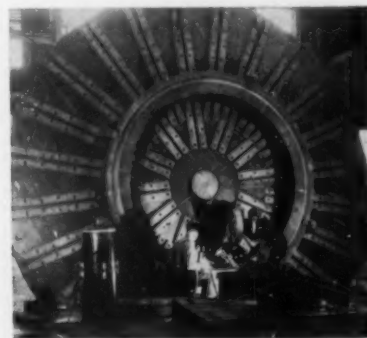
Welding positioner used to hold rotary kiln riding rings rigidly in place during fabricating process
